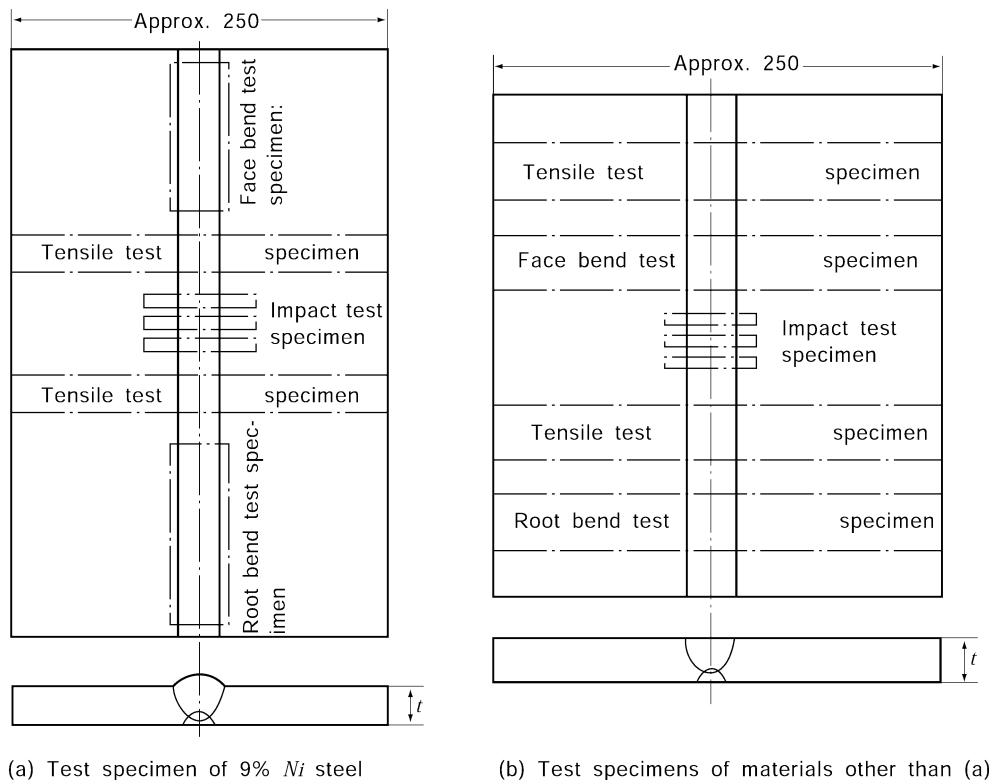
Test Specimens for Production Weld Test (Units : mm, thickness t)
